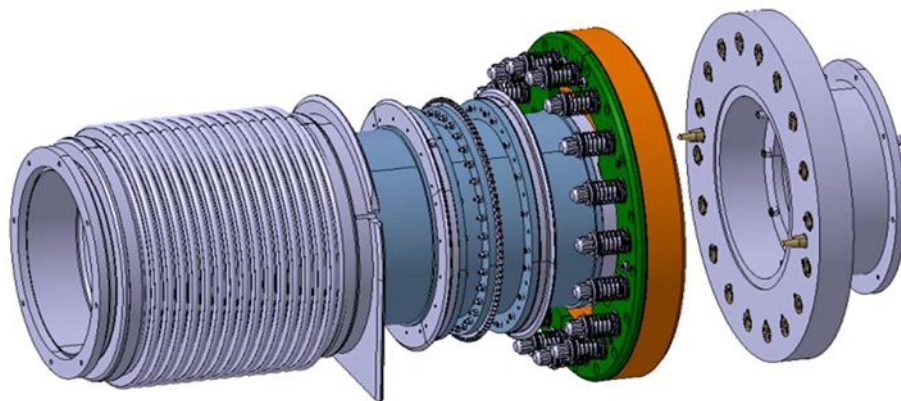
Remote handled vacuum flange and double bellows sub-assembly
